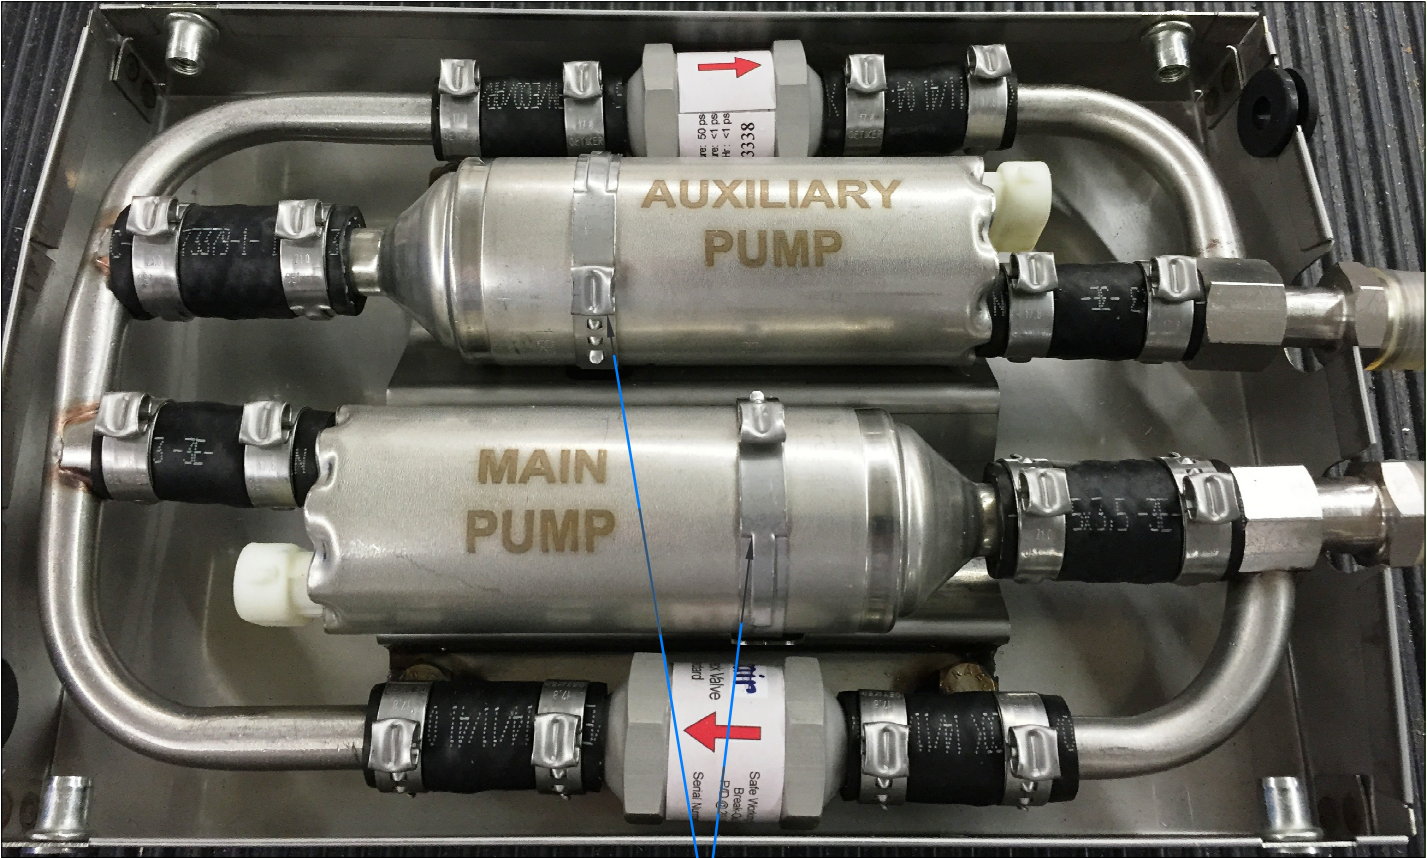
FUEL VALVE BRACKET ASSEMBLY
